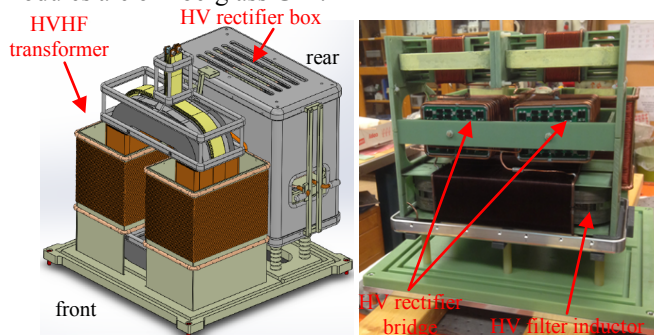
One HV module; Left: 3D CAD model; Right: Picture from rear side without box enclosure
